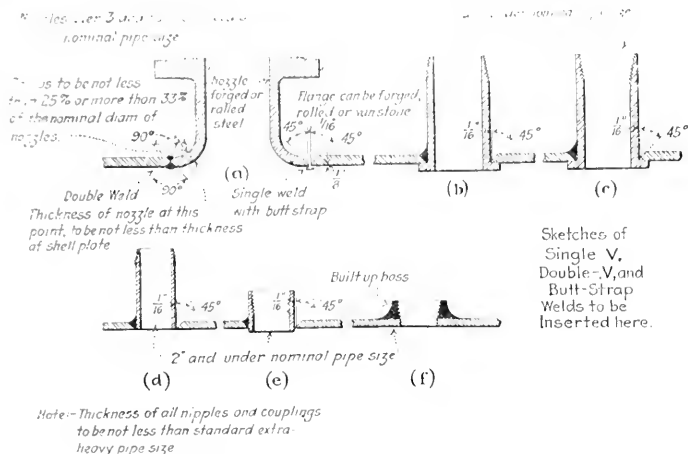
METHODS OF AUTOGENOUSLY WELDING NOZZLES
